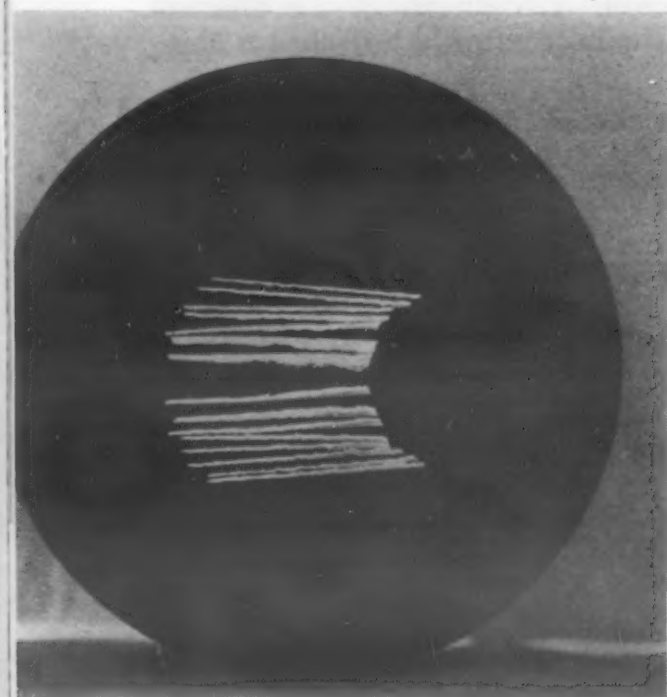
Portion of sample chip mounted in Bakelite mold.
